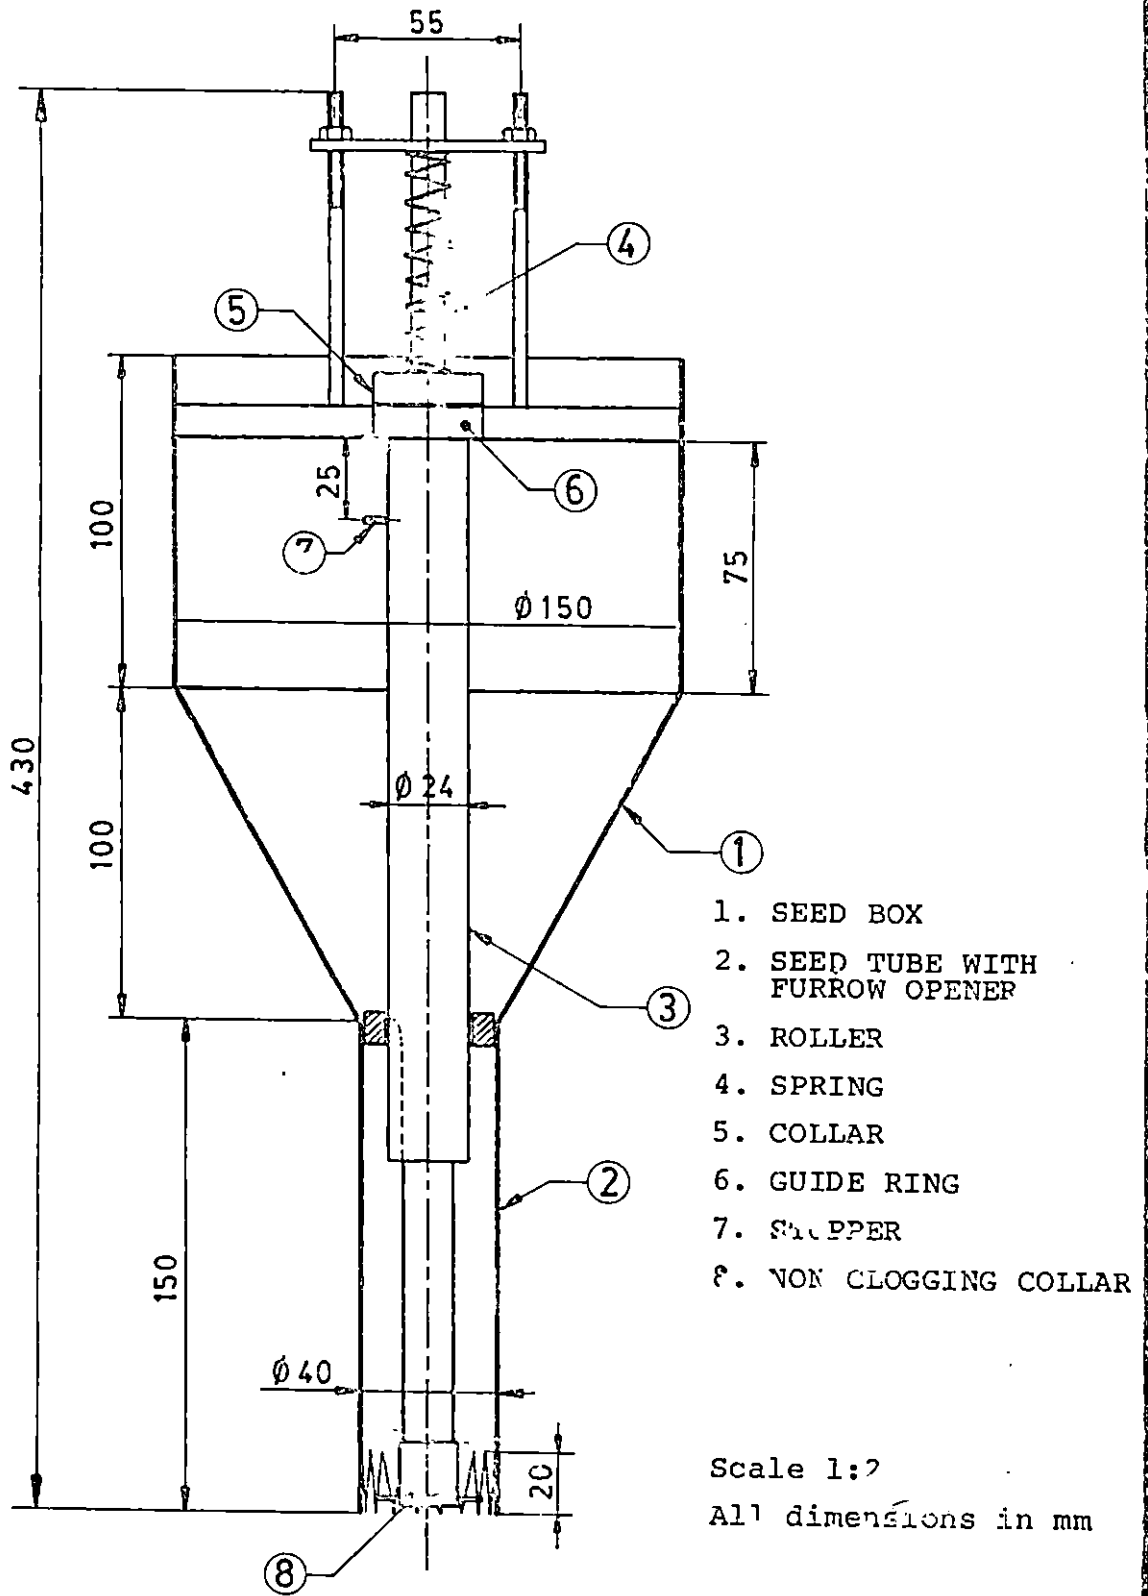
SECTIONAL VIEW OF SEED BOX WITH ROLLER
